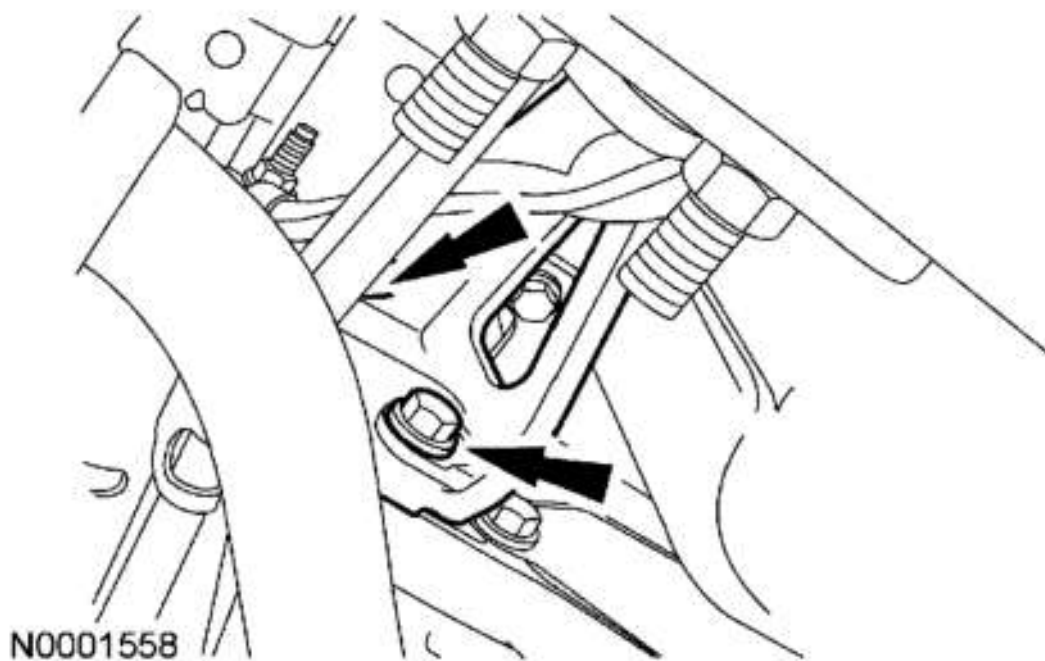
Removing RH Engine-To-Transmission Support Bracket
